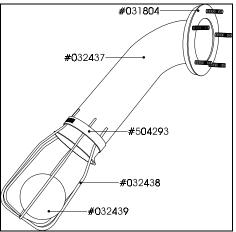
BALL CHECK VALVE FLANGE #032436
